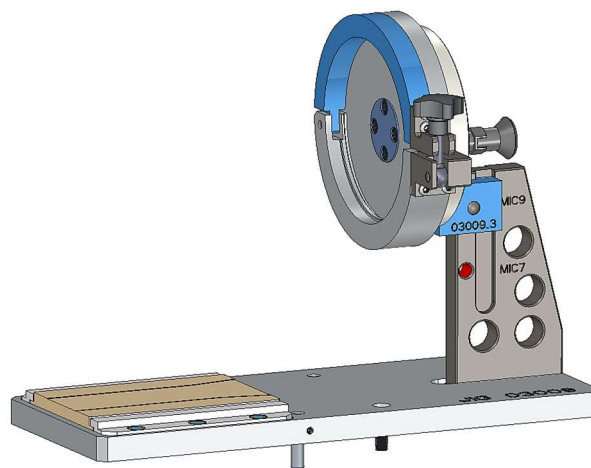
New assembly fixture to workstation 07 for tight the arms.
